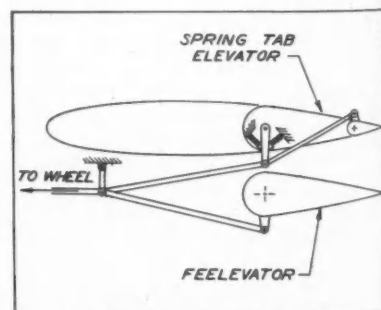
Schematic diagram of a spring tab elevator and a flelevator
